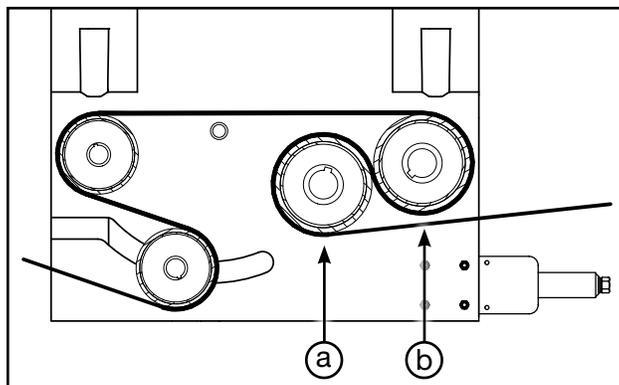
Drive box, pinch roller (a) & drive roller (b)
